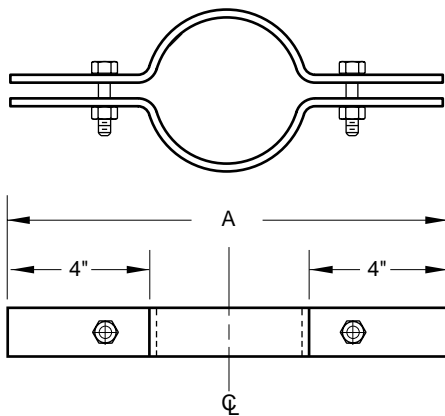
CT – COPPER EXTENSION RISER CLAMP
